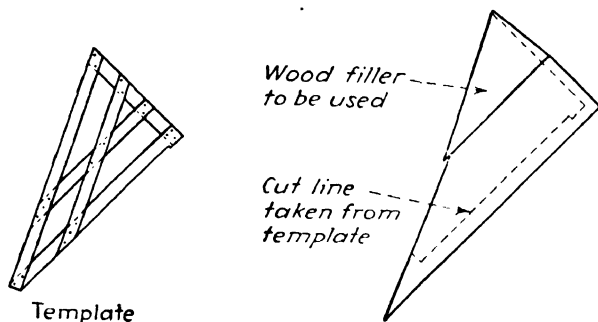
Templates used for fabricating bilge keel wood fillers and their method of application.
